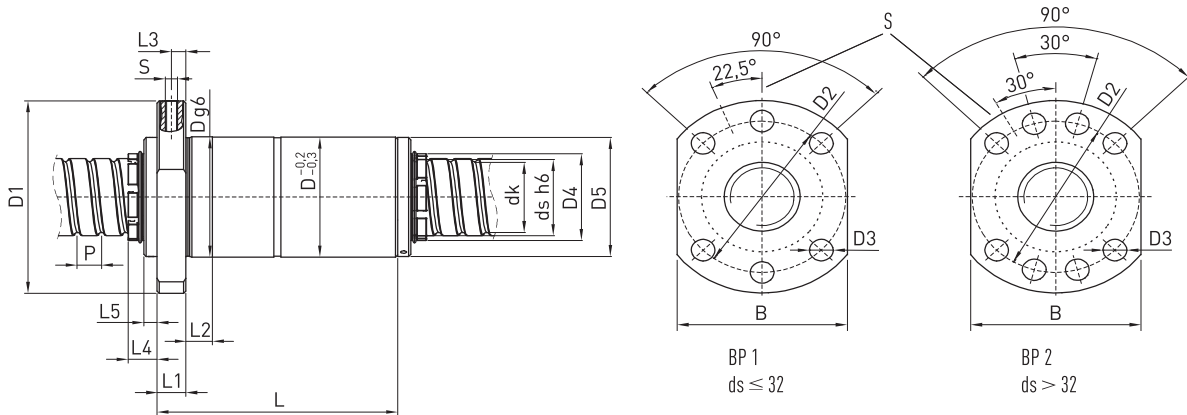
Flange double nut DDB-x with Wiper K and V
